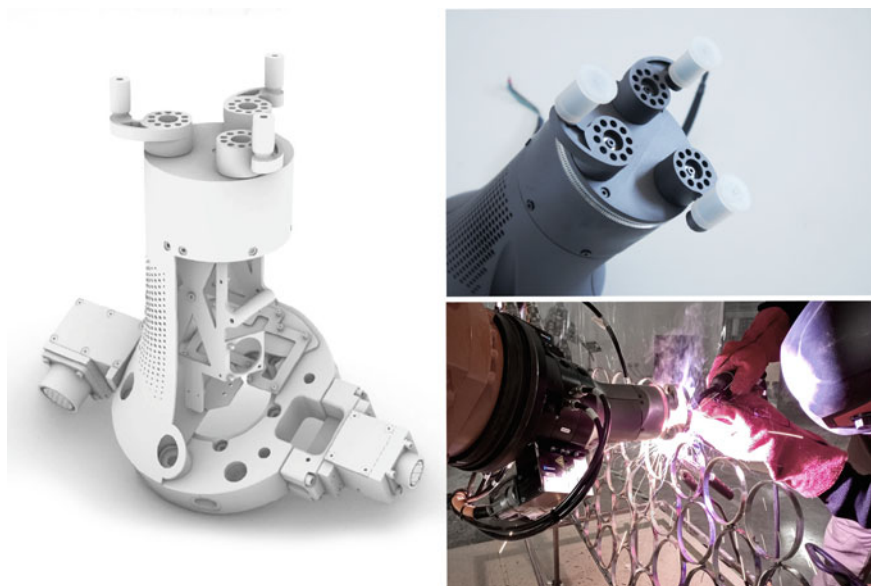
Digital assembly of the self-centering gripper (left). In-house 3d printed functional end-effector (top-right). Testing the collaborative construction protocol (bottom-right) with the robot positioning building components and the welder fixing parts in place
